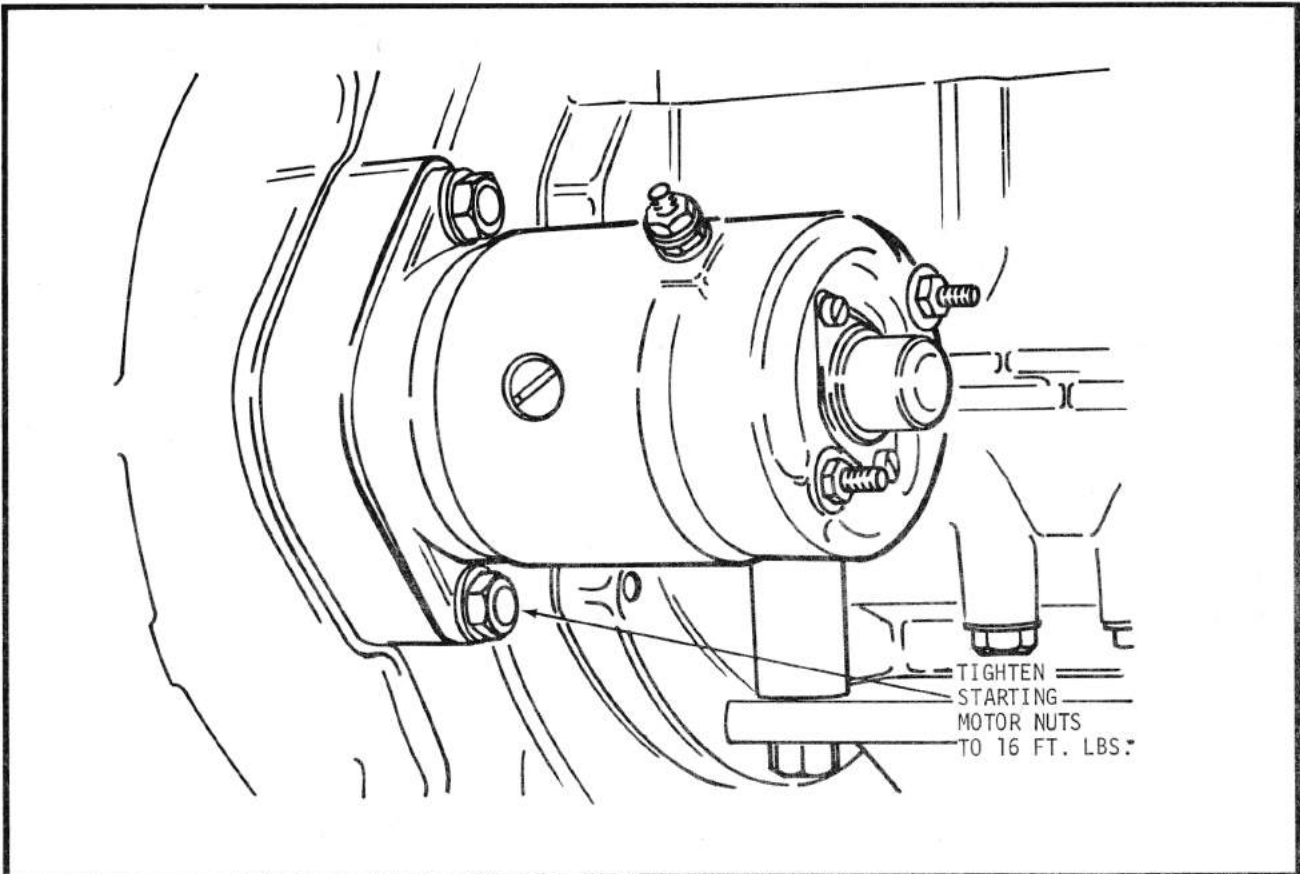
ELECTRIC STARTING MOTOR INSTALLED
